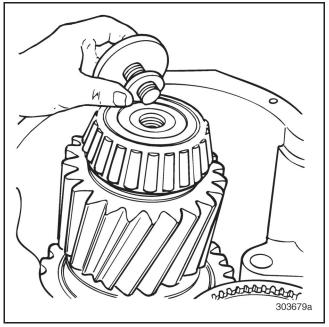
Removing Clamp Plate, Capscrew and Shims
